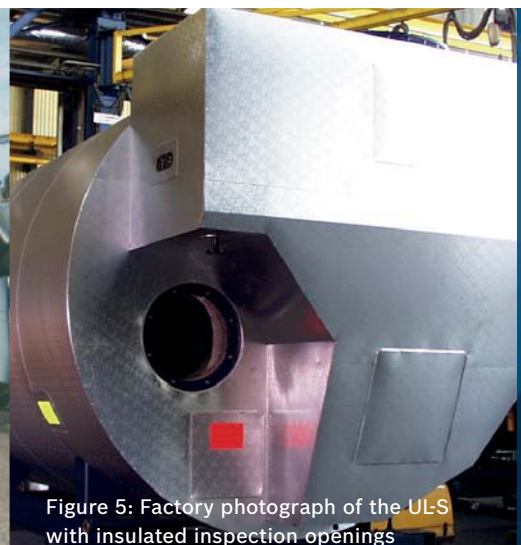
Factory photograph of the UL-S with insulated inspection openings
